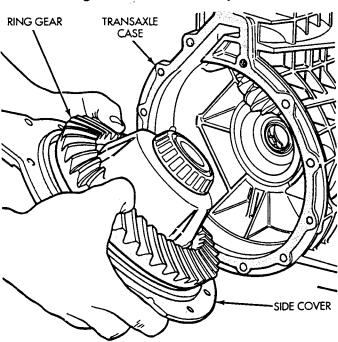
Remove Differential Side Cover, Carrier and Ring Gear Assembly
